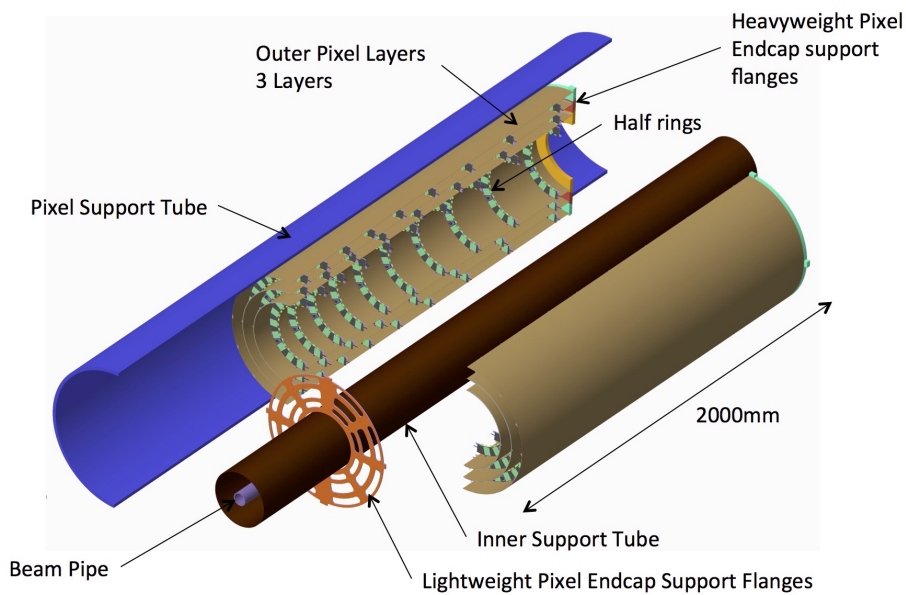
Exploded 3D drawing of one Outer End-cap.
